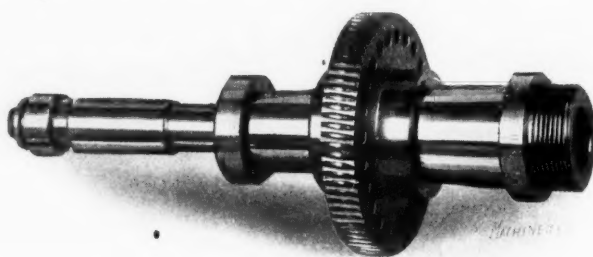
Dividing Head Spindle and Worm-wheel Assembled
